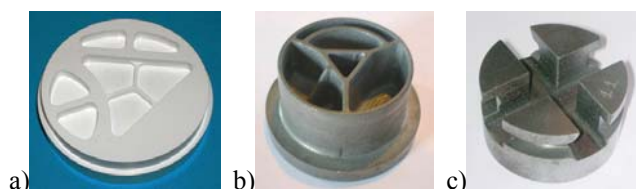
HVC parts finished by high-velocity green machining a) alumina b,c) steel
